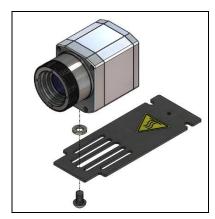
PI 4xx/ 640/ 1M/ 05M attachment
